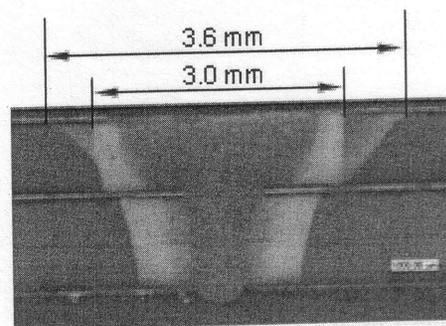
The cross-sectional view of laser/GTAW preheating weld.
